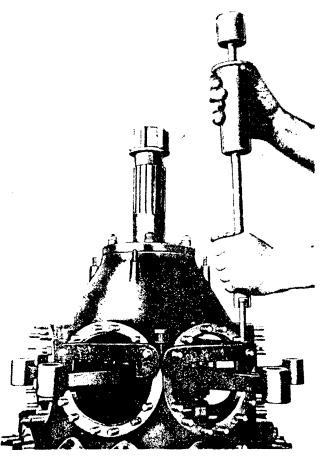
Removing Crankcase Bolts with Tool No. 3893
